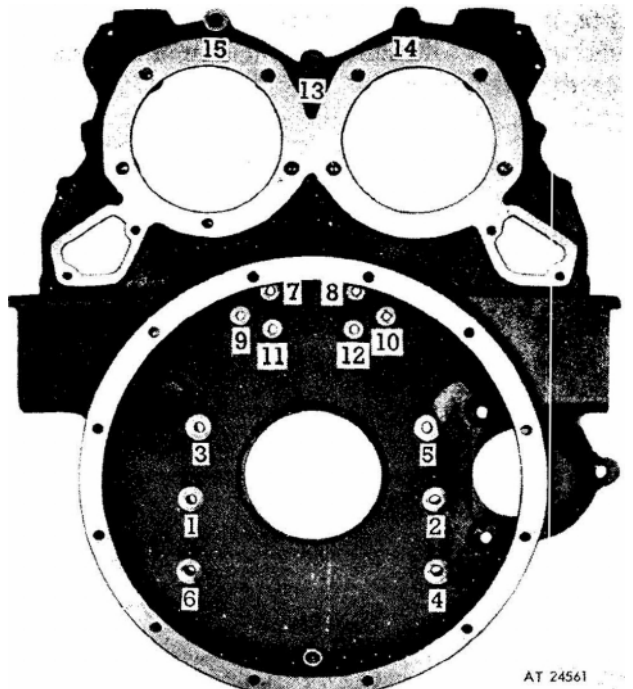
Flywheel housing bolt tightening sequence (operation 2)—in-line engines.
